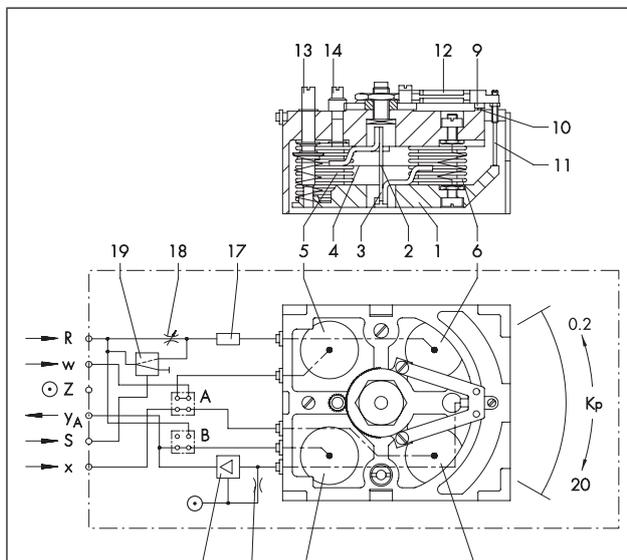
Schematic drawing of Type 3433-2 PI Controller Module
